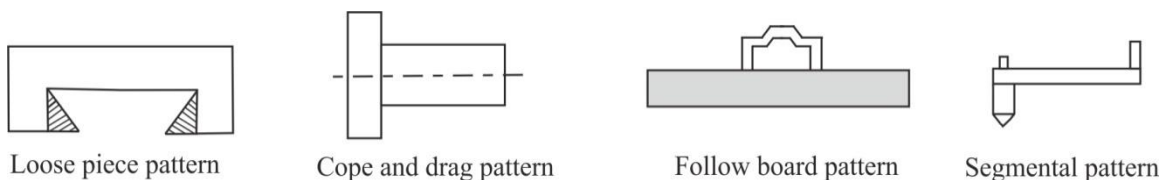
Types of patterns: Loose piece; Cope and drag; Follow board; Segmental pattern
